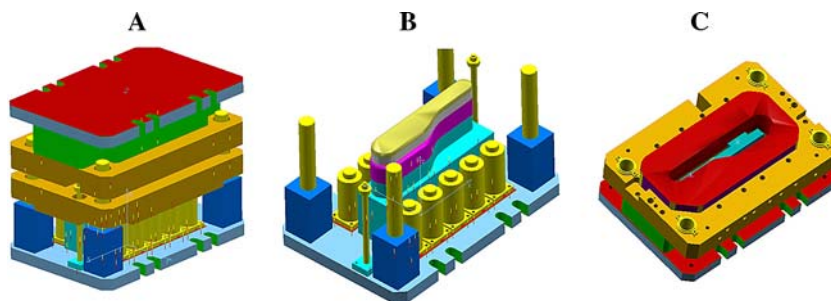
Tool set-up. (a) Complete tool; (b) Punch and gas springs; (c) Inserts and blank holder
